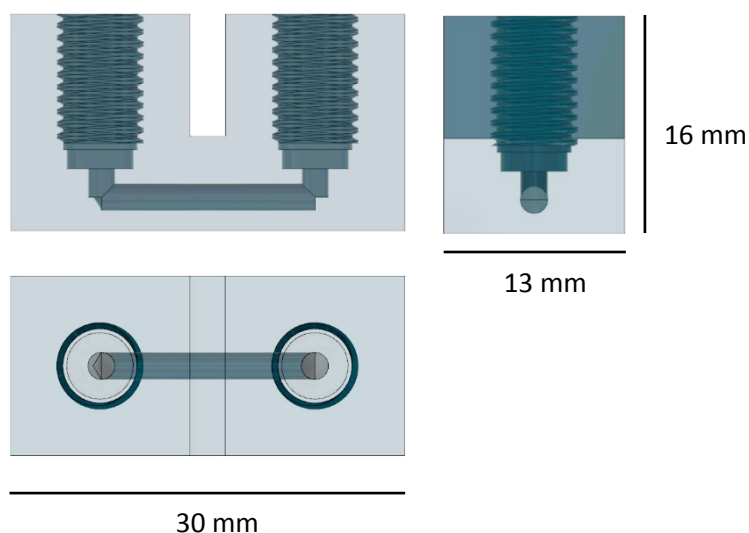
(Top left) Side profile of pressure test part (bottom left) top profile view (right) end profile view.
